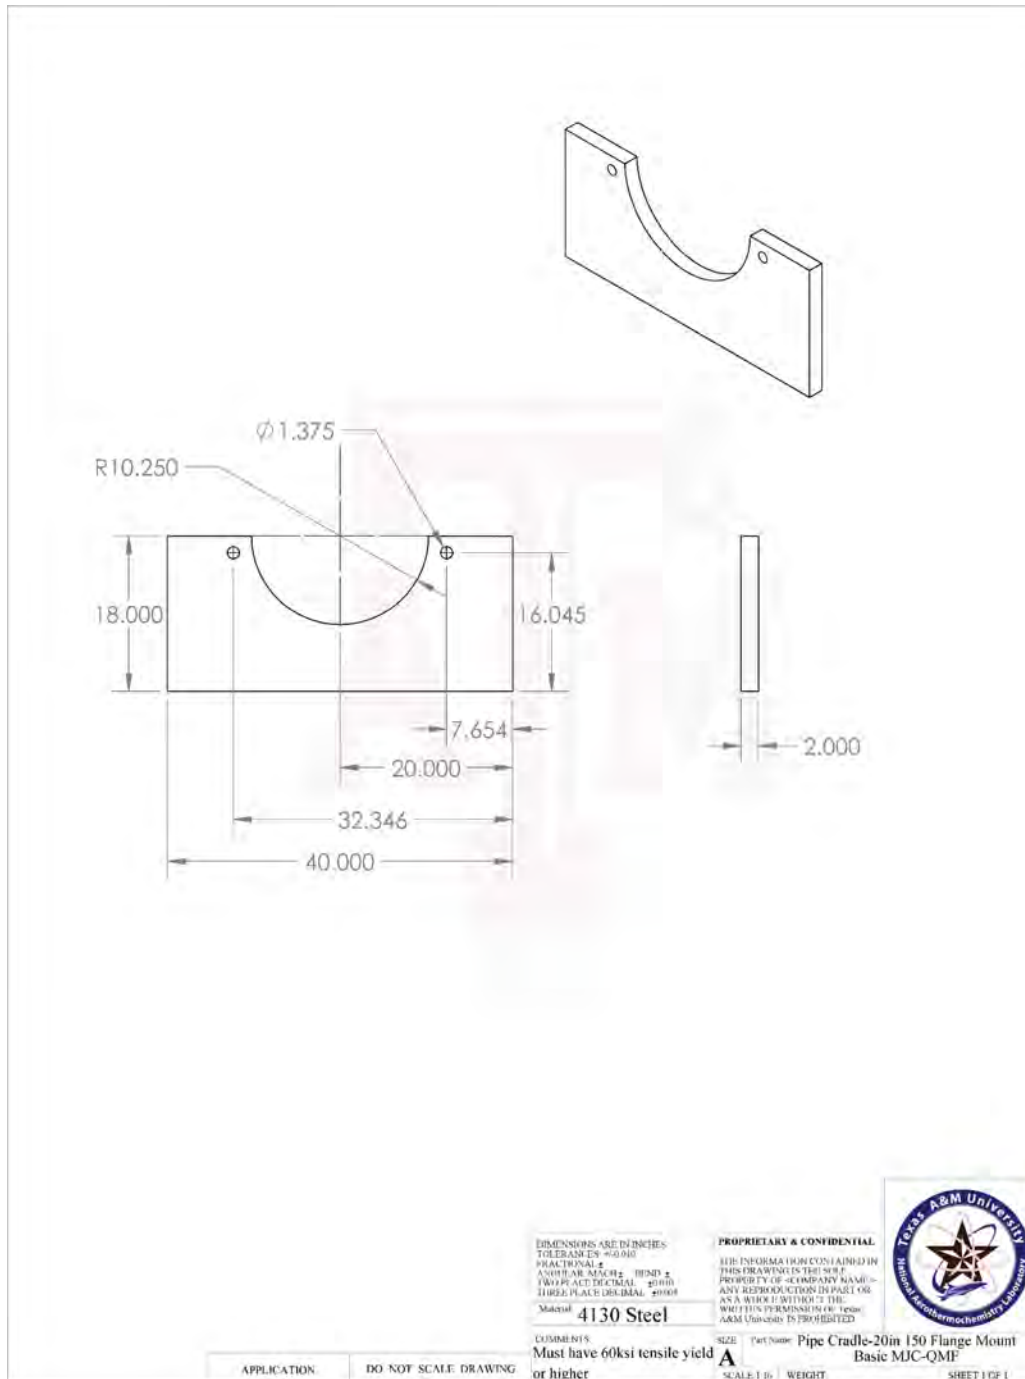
DIMENSIONAL DRAWING FOR PIPE CRADLE PLATE TO HOLD THE 20-IN 150-LB FLANGES AND 20-IN SCHEDULE 80 PIPE.
